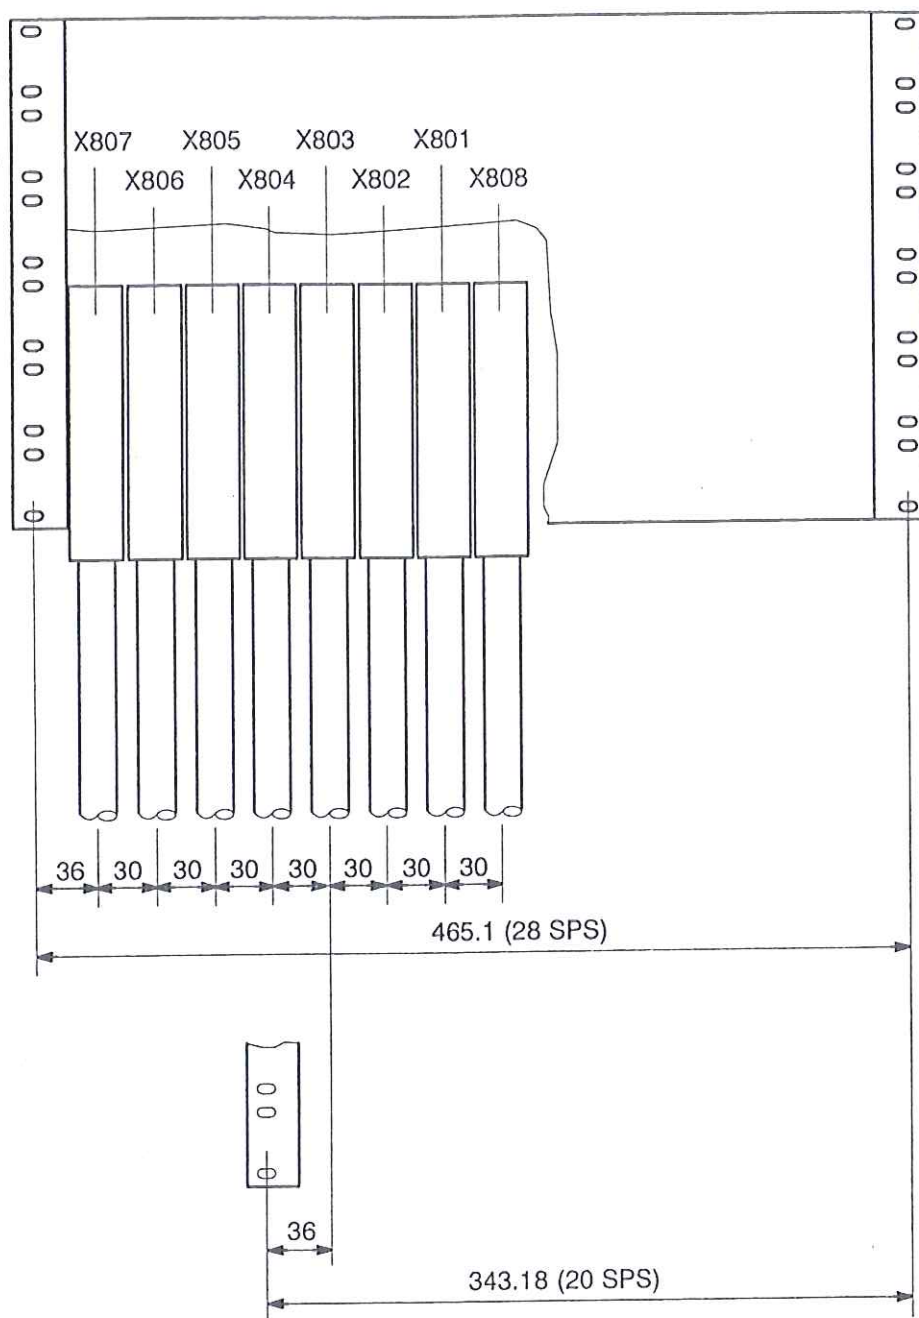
Dimensions for attaching the cables (schematic of the front view of the module rack without modules)
